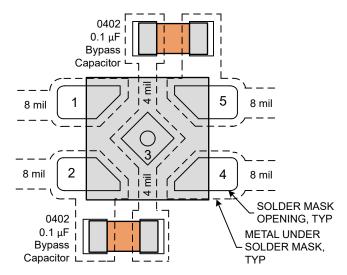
Example Layout for the DPW (X2SON-5) Package
